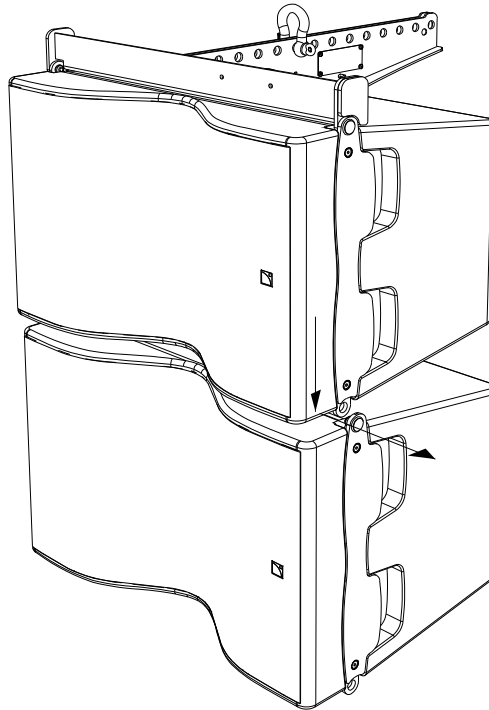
Attaching KIBU+KILO assembly to 2nd KILO
